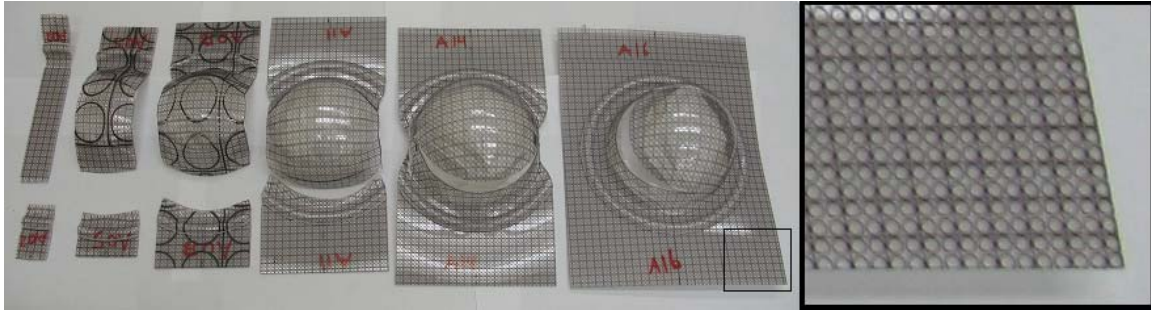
Formed rectangular specimens (left) and a zoomed-in view of the printed grid (right).
